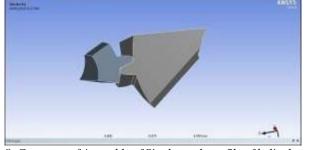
Geometry of Assembly of Single tooth profile of helical gear pair
